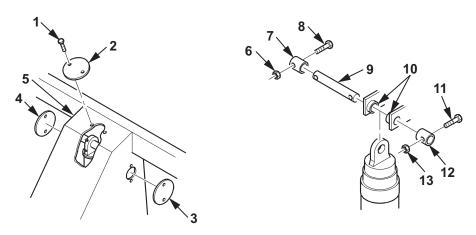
Access Covers and Hoist Cylinder Pin Installation.
